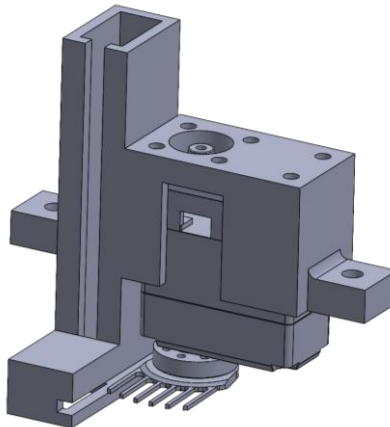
CAD model of rev3 with compliant 3d printed pusher
